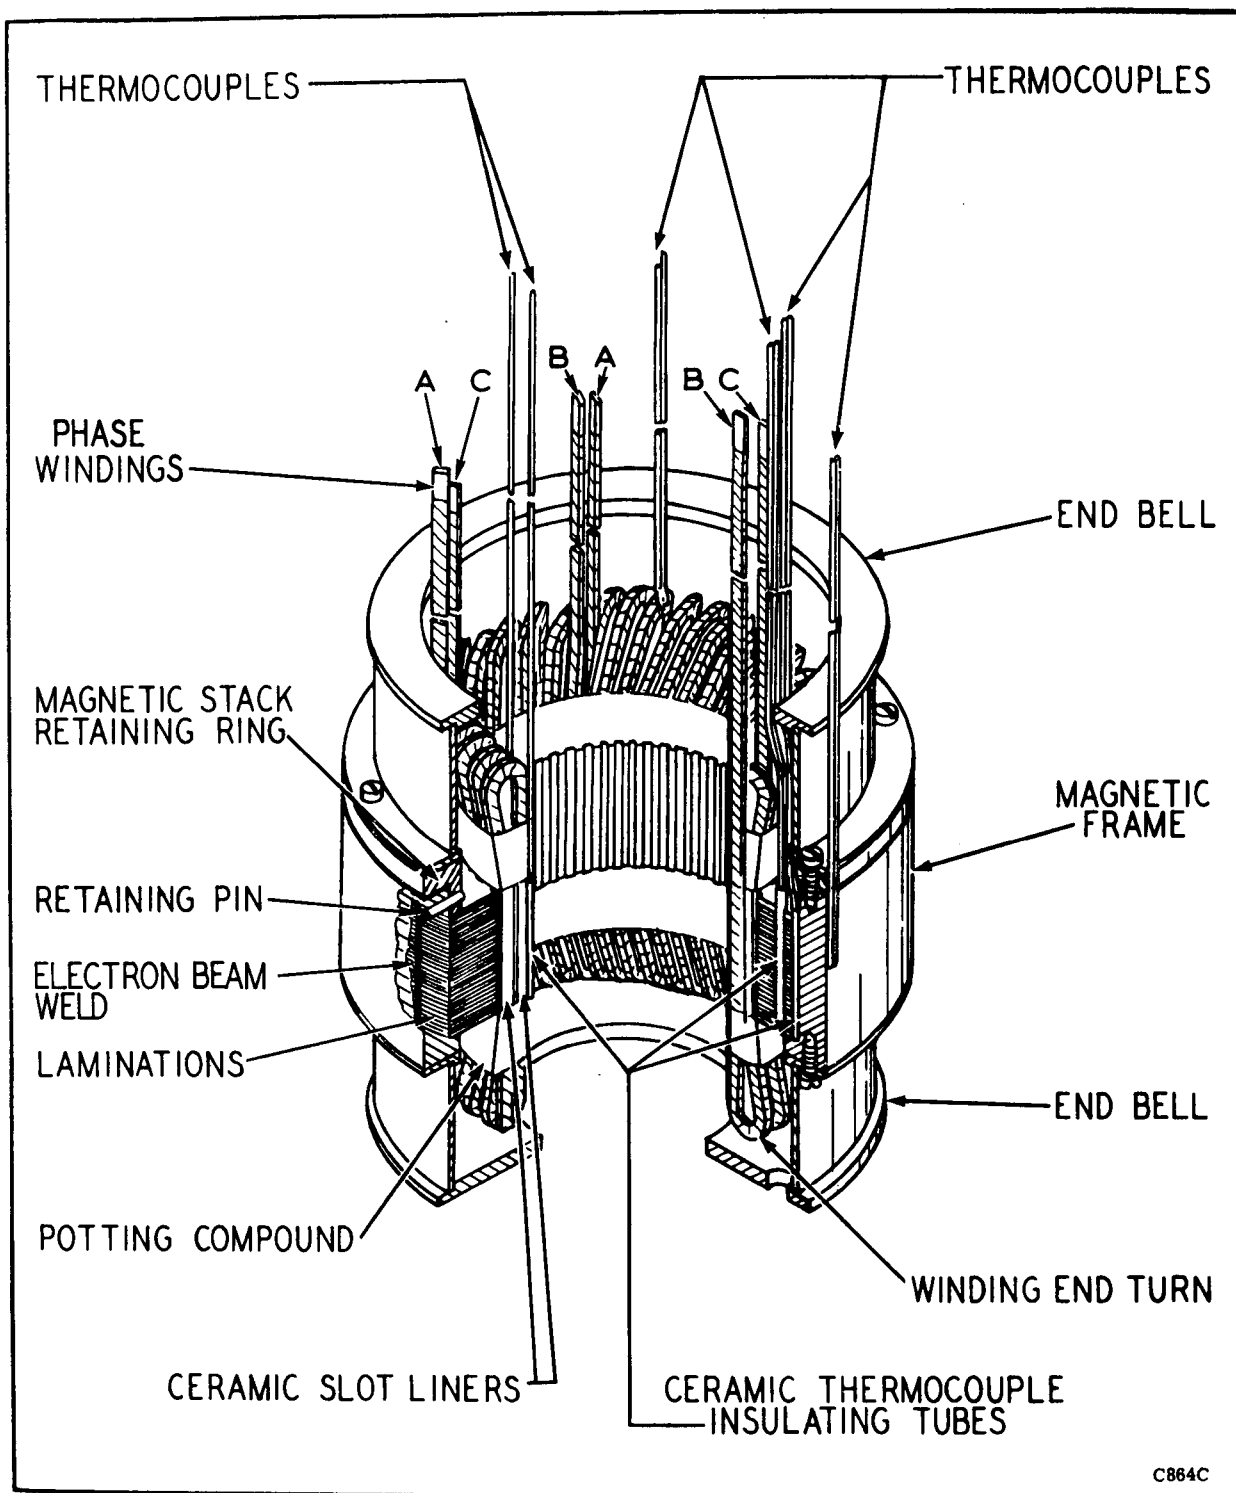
Cutaway Drawing of Stator Used in the 10,000-Hour, 1300° F Ultrahigh Vacuum Endurance Test
